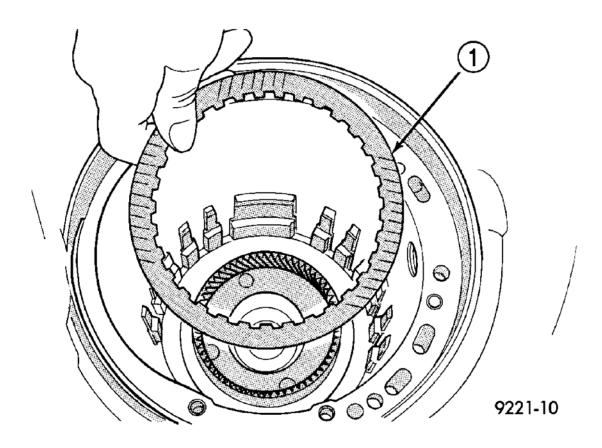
Installing One Low/Reverse Clutch Disc Courtesy of CHRYSLER LLC
